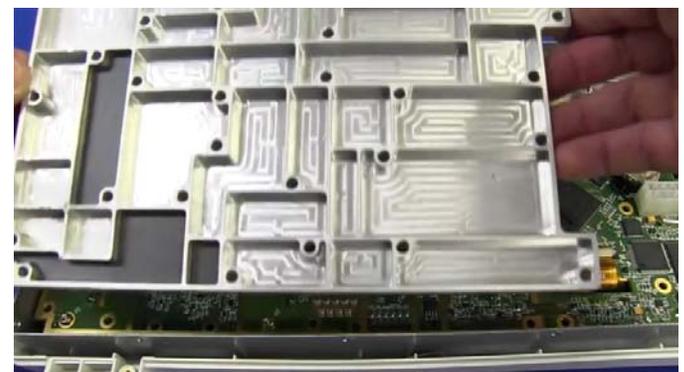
Construction of the RF shielding-box milled from solid aluminum block
